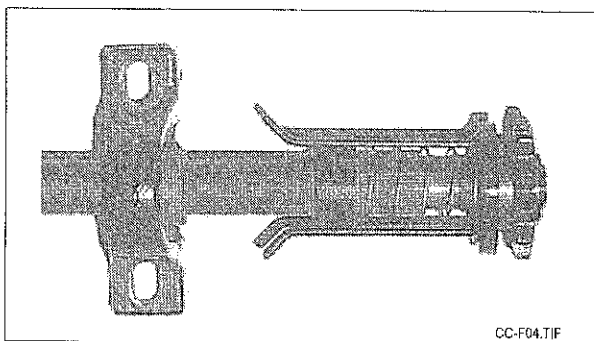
Clutch Engaged - 2135/3000 Series
